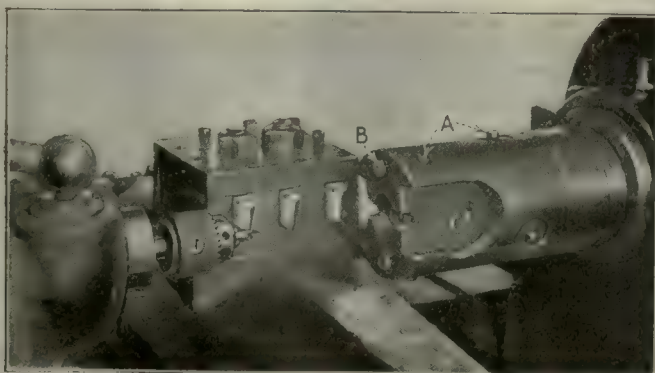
DRIVER AND TOOLS FOR ROUGH-TURNING
